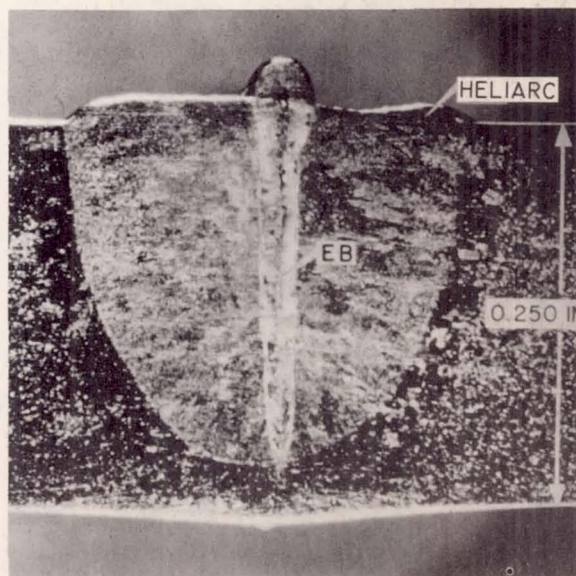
Comparison of weld zones. Electron beam and heliarc techniques. (Courtesy Hamilton Standard Div., United Aircraft Corp.)
